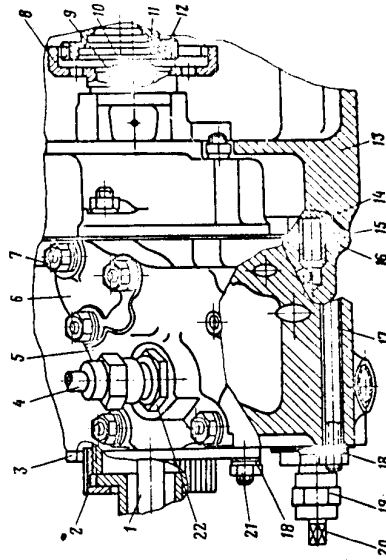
Attachment of Oil Unit to Accessory Drive Gearbox
